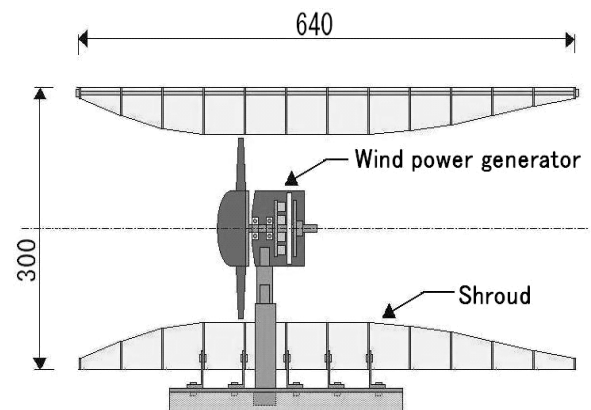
Cross-sectional drawing of a wind generator with a cylindrical shroud
